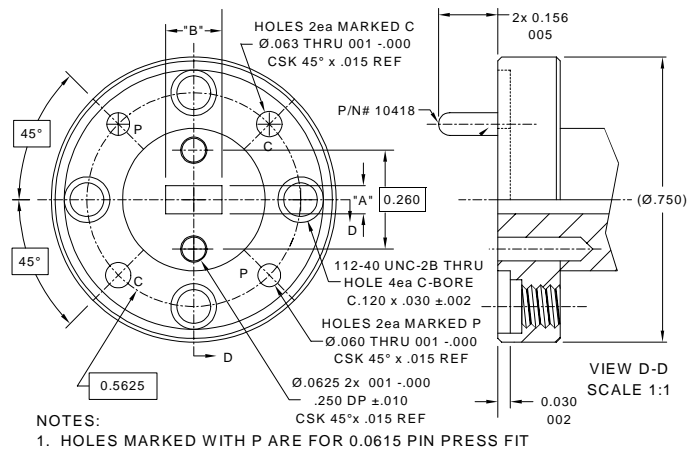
, Precision MIL-F-3922-67B- (67B) flange adapted to WR-08 and smaller.
